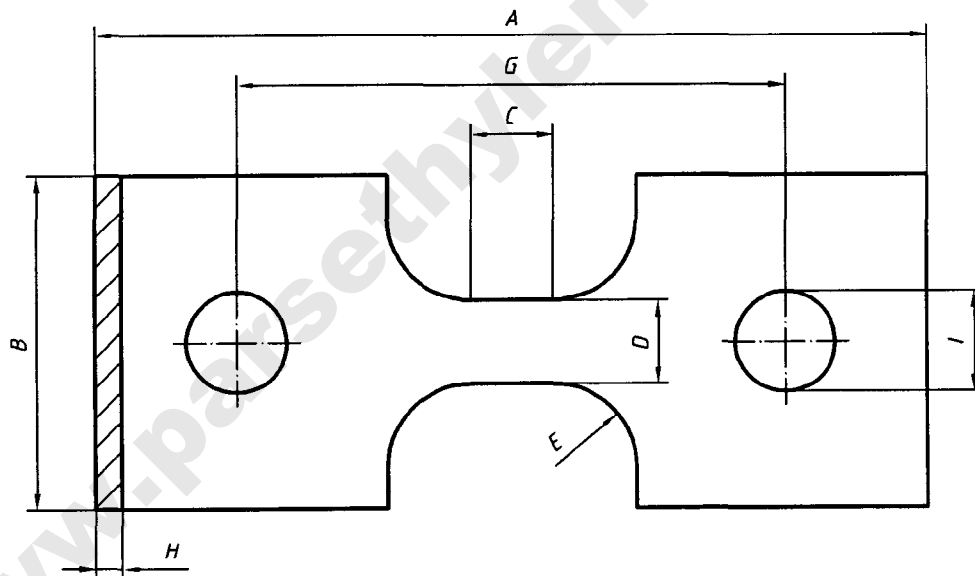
Machined type B tensile test piece (for $e \geq 25$ mm)
